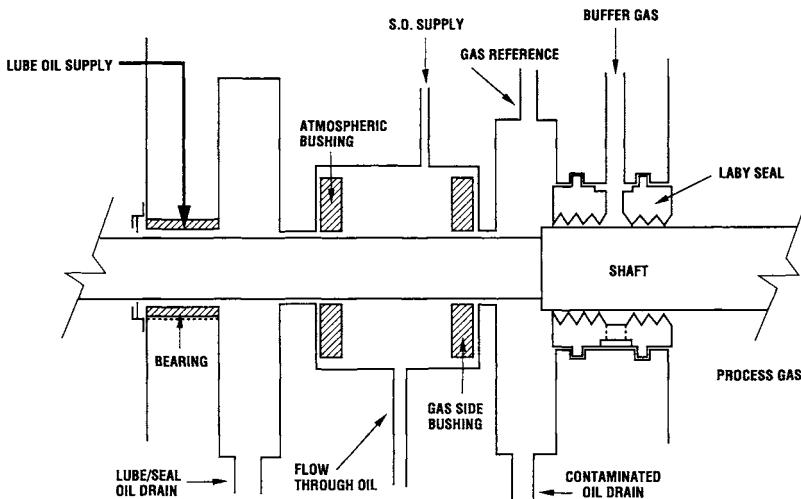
Bushing seal schematic (Courtesy of M.E. Crane Consultant)
